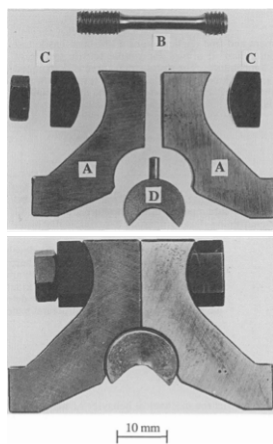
Alternative clamping device for tensile testing designed by Schindler and Veidt, consisting of (A) two arms, (B) the tensile specimen, (C) cylindrical shoulders and (D) a central pivot.
